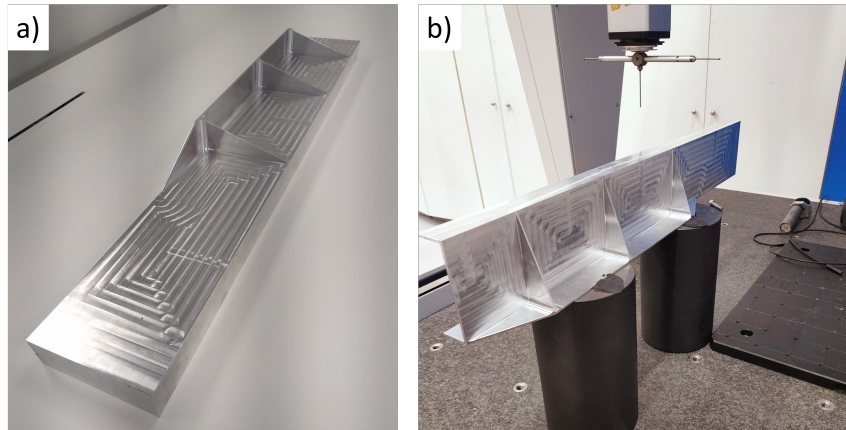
a) Final part machined; b) Measurements in a CMM.
